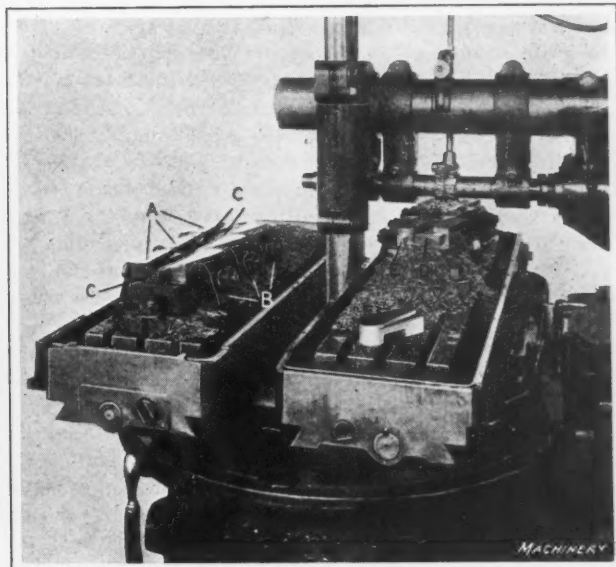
Indexing Milling Machine equipped for performing Eighth Operation on Turret Revolving Pawls
